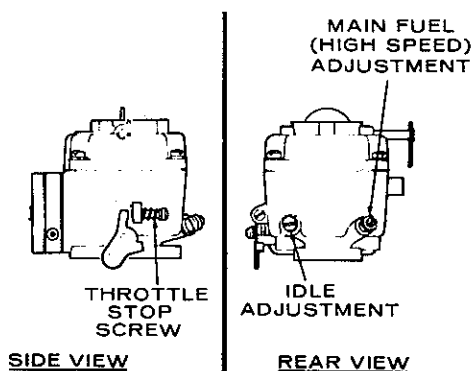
MAIN FUEL AND IDLE VALVE ADJUSTMENT
